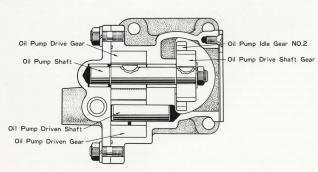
Cross Sectional View of Oil Pump G1150
